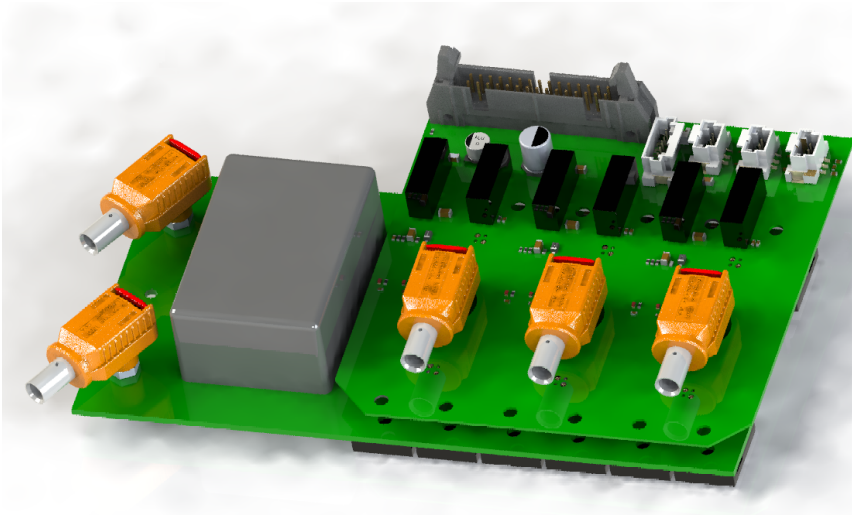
Gate driver and Power PCB assembly in Solidworks.
